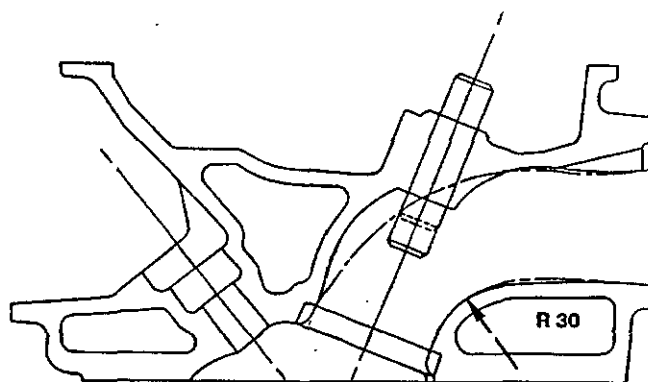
Second version of Improved Inlet port which avoided changes to the coolant jacket
